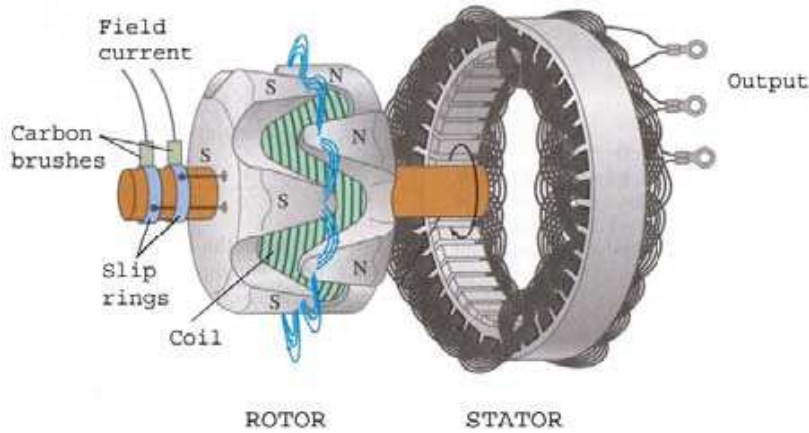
Exploded view of an automotive alternator [19], [20].
